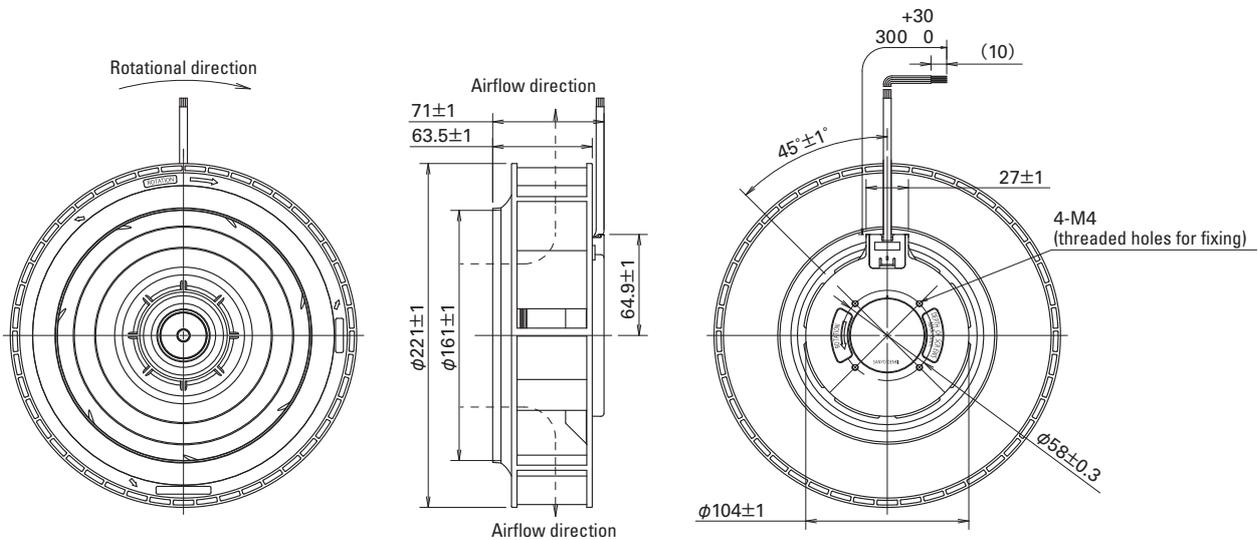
"San Ace C221" 9TP type dimensions (unit: mm)
